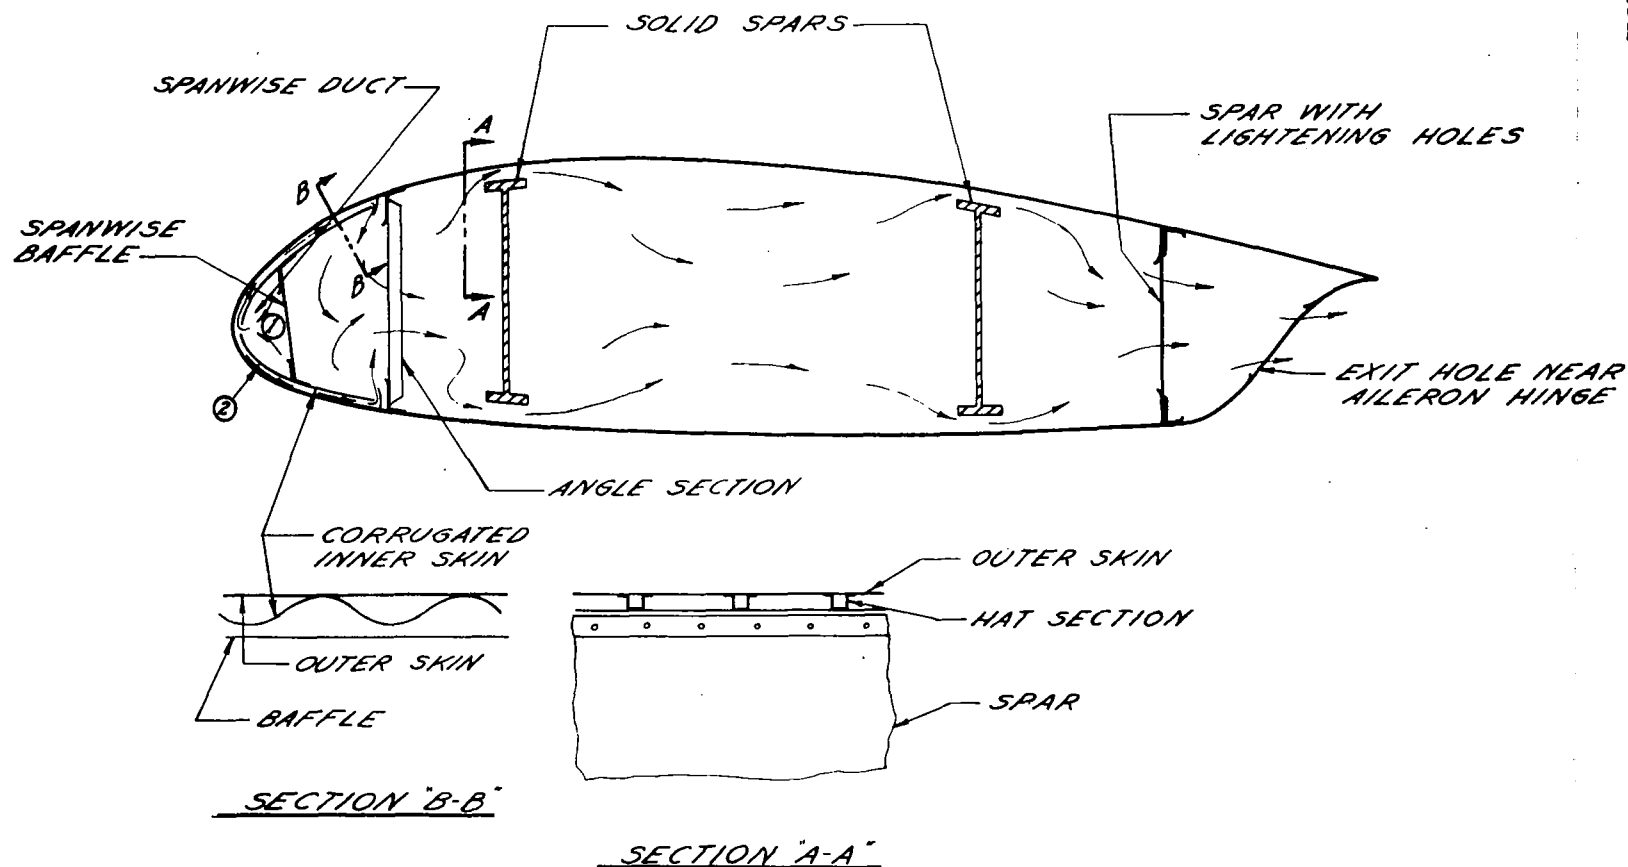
Typical section through the outer-wing panel of the Ju 88 airplane, showing the principal parts of the wing anti-icing system.
